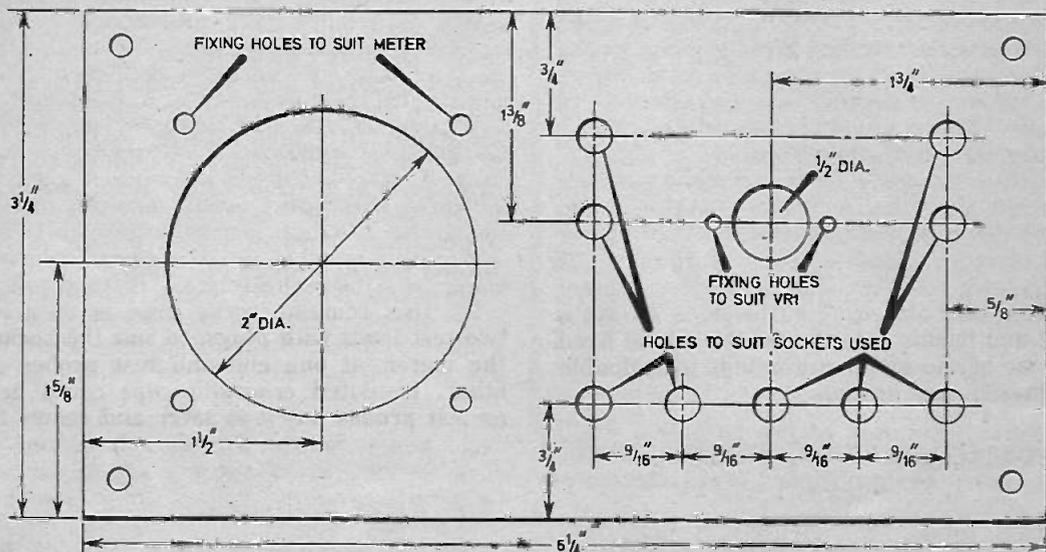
Layout and drilling details of the Multimeter front panel. A larger panel would be required for larger type meters.
